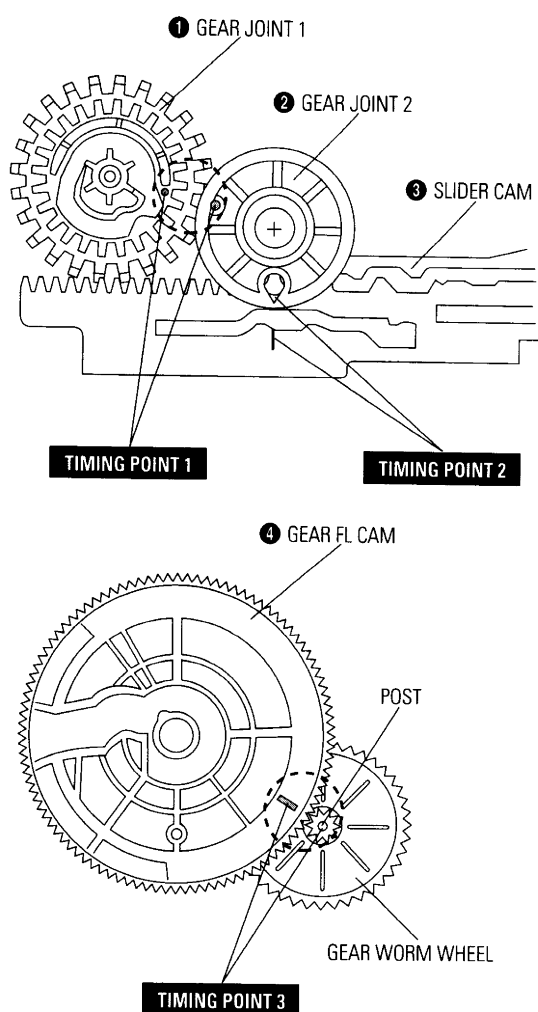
Assembly of Gear FL Cam, Gear Joint 1, 2
